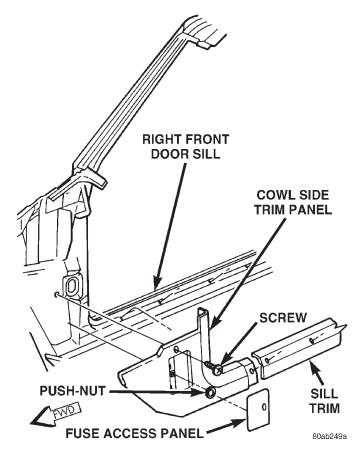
Right Cowl Side Inner Trim Remove/Install
